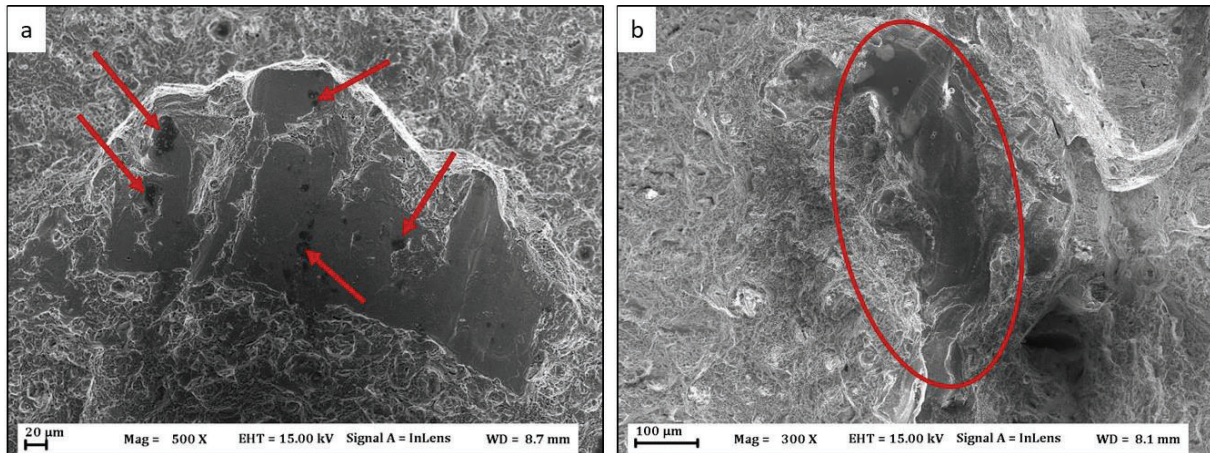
Oxide inclusions present on the fracture surface of samples fabricated from (a) virgin powder; (b) 14 times re-used powder [86].
